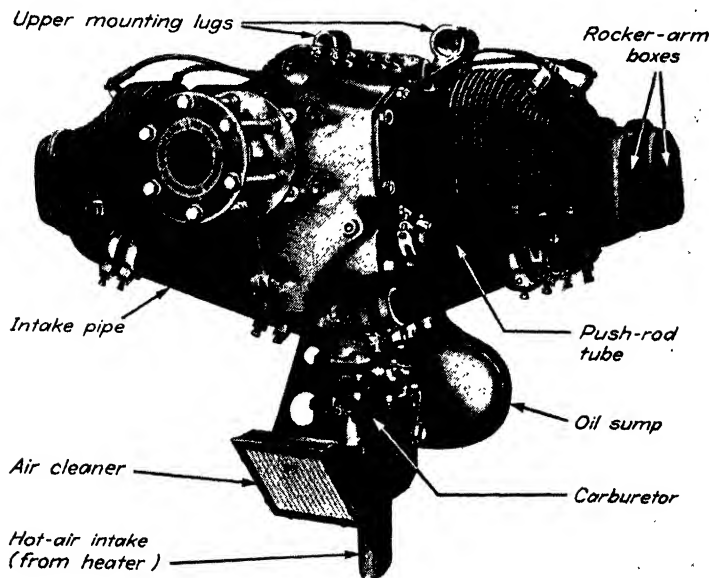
Continental C-85 engine. (Continental Motors Corporation.)
